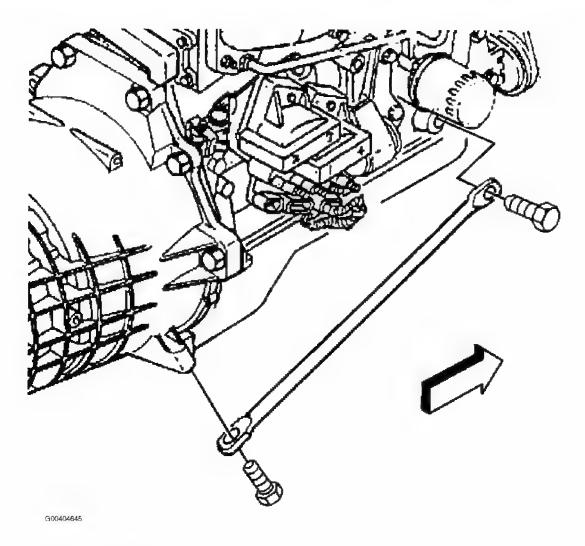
Installing Right Side Engine-To-Transmission Brace Courtesy of GENERAL MOTORS CORP.
